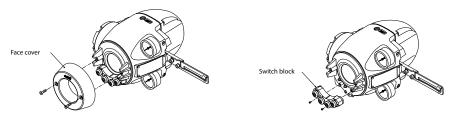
Removal of face cover Figure 6-8 Removal of switch block
